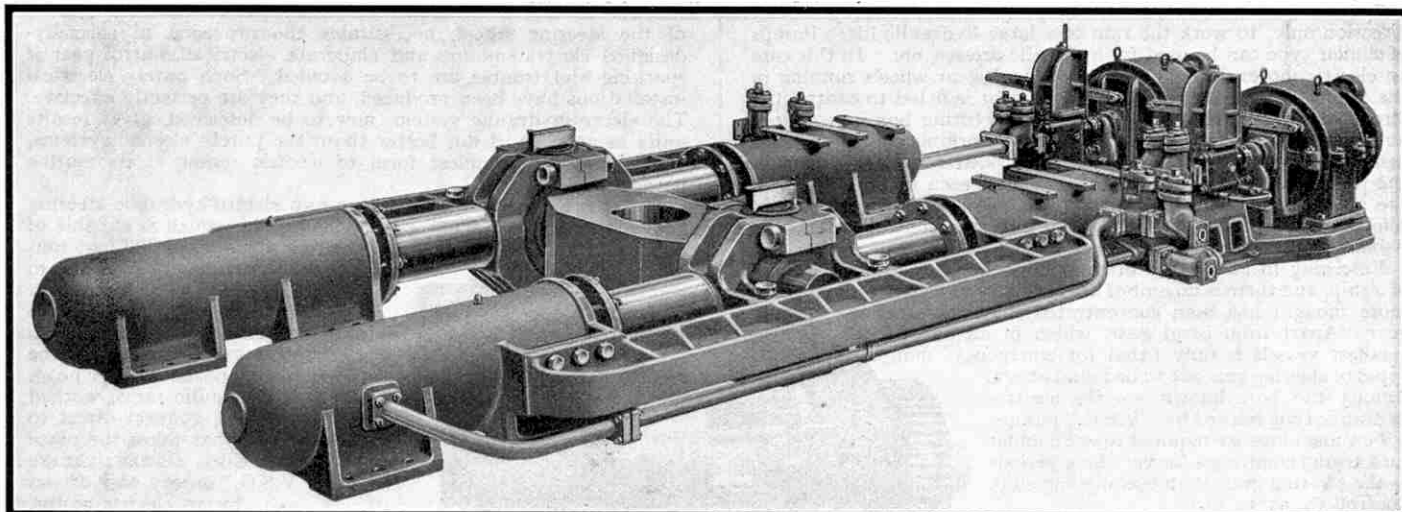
A four-ram electro-hydraulic steering gear fitted with "V.S.G." pumps.
